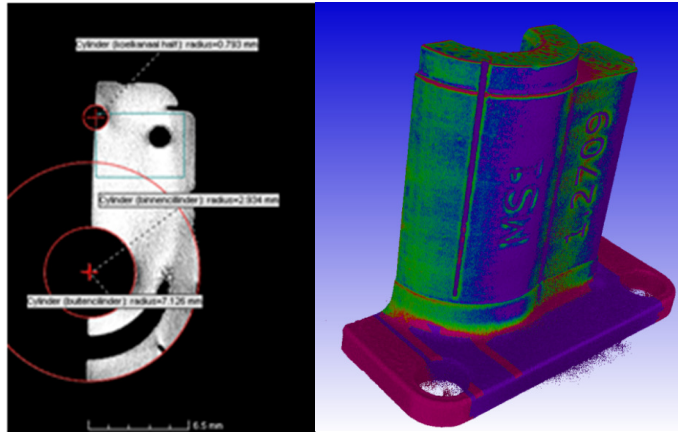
CT SLICE AND COMPARISON OF LASER SCANNING MEASUREMENT AND CT MODEL OF INDUSTRIAL WORKPIECE – NOZZLE (PRODUCED BY LAYERWISE-3D SYSTEMS [103])
